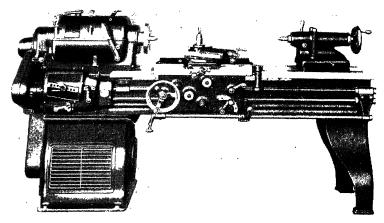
A.—Metalworking lathe. This is one of the most basic machine tools and probably the oldest, since its crude ancestor had been known for centuries. This particular lathe has a lead screw on the side so that the machine can cut screw threads. By rotating the top of the tool support short tapers can be turned. For long tapers the taper attachment must be used. See Fig. 91B. (Rockford Machine Tool Co.)
